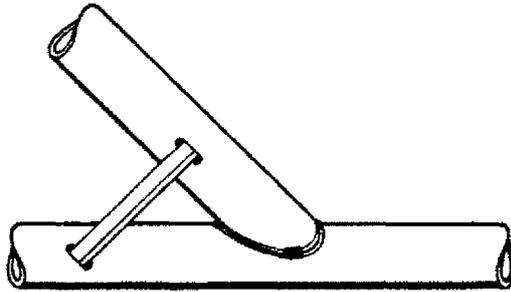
Using a support to maintain the correct angular alignment when welding a pipe joint.
